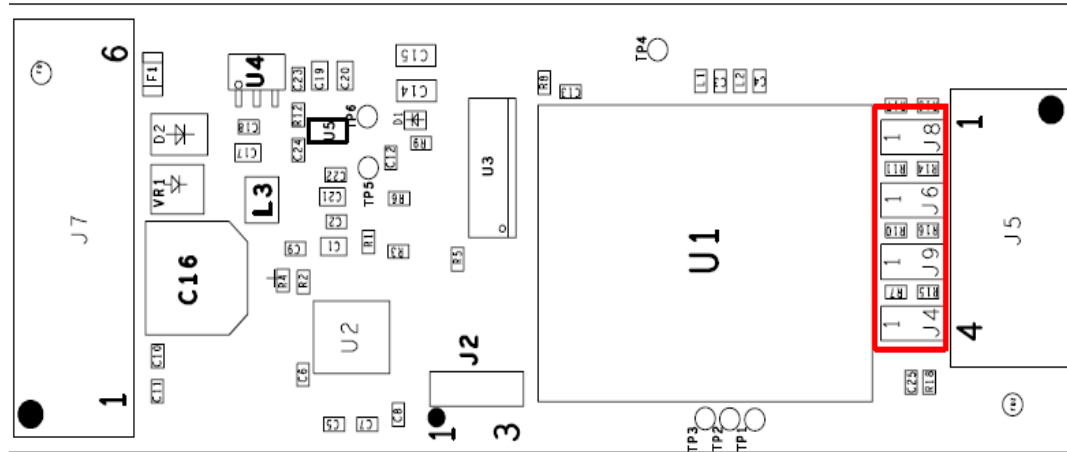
Board Connections, Jumper Settings of Dinrail variant
